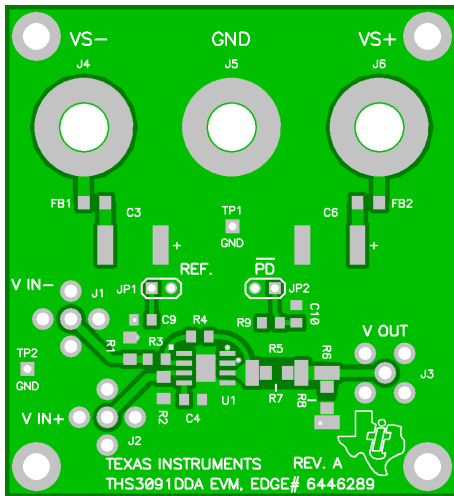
THS3091 EVM Board Layout (Top Layer)
